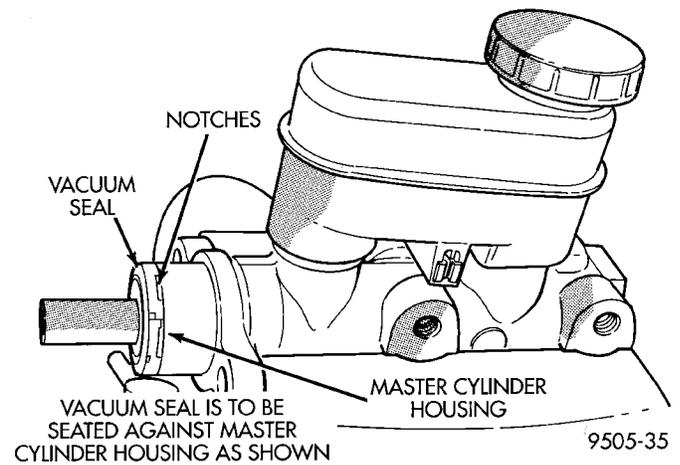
Vacuum Seal Positioned For Installing Master Cylinder
